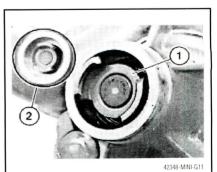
Aligning water pump drive (1) to supercharger drive (2)—Cooper S Coupe
